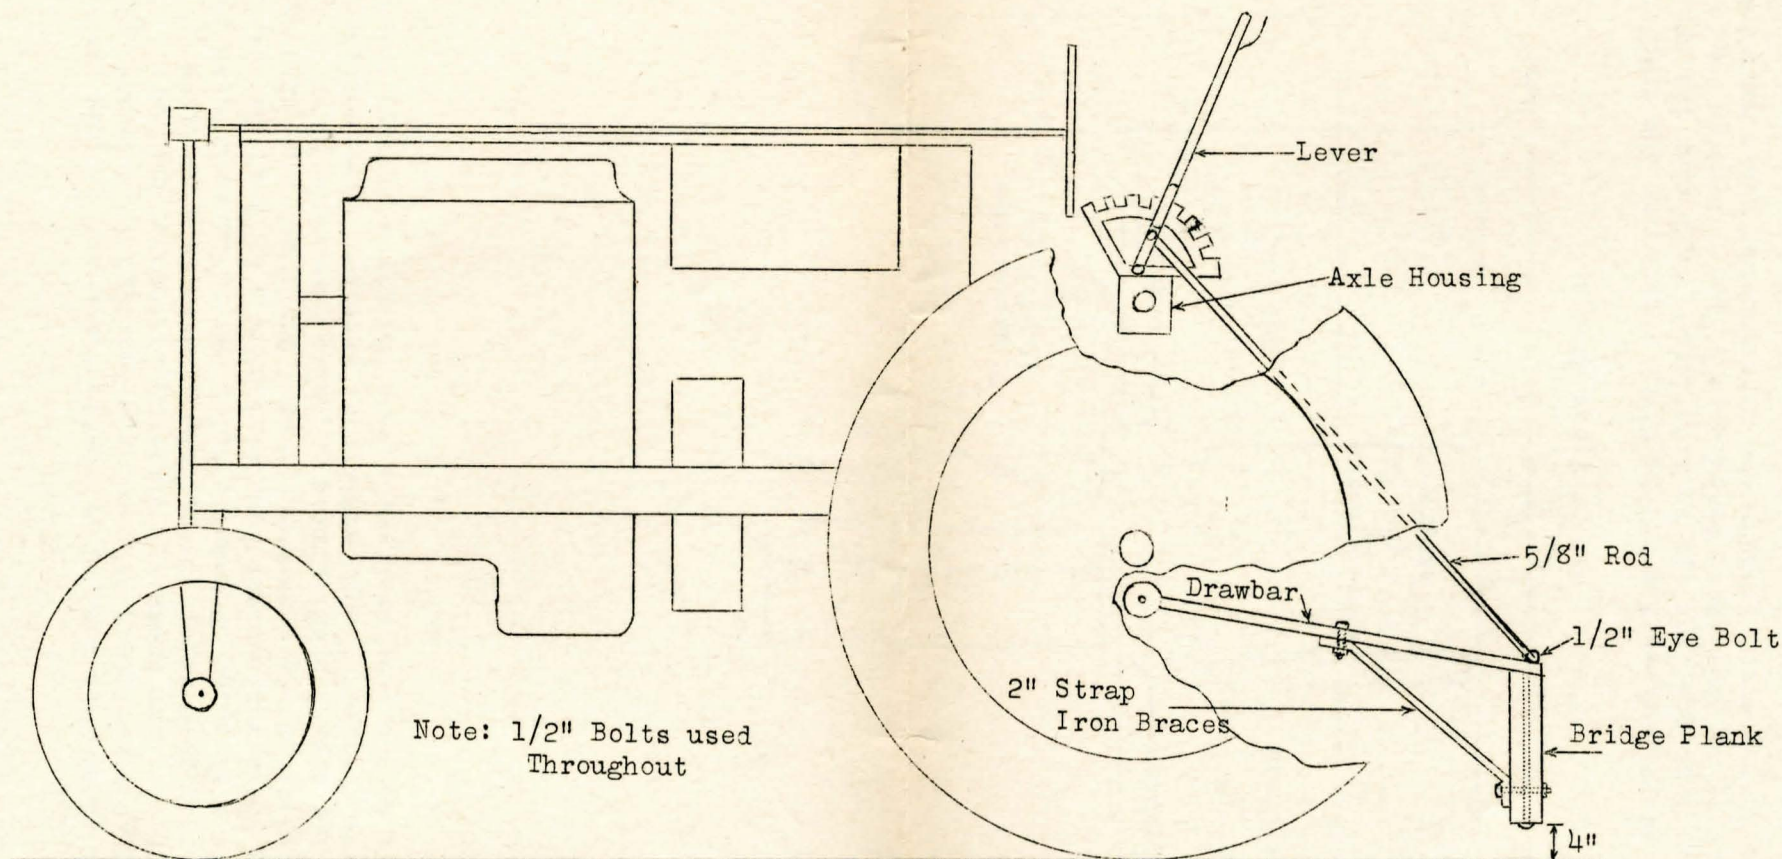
A side view of the plank mounted on the tractor drawbar. One slight disadvantage of having the plank mounted in rear is that the drive wheels pass over the pile of ensilage first, holding the plank too high to catch a load until the wheels start down the other side of the pile. It is possible to change the drawbar to a forward position and mount the plank ahead of the drive wheels. With either of these mountings it is advantageous to have some means of adjusting the height of the plank. An old style (angled) lister cultivator lever bolted to the axle housing of the tractor will be satisfactory for this purpose.
